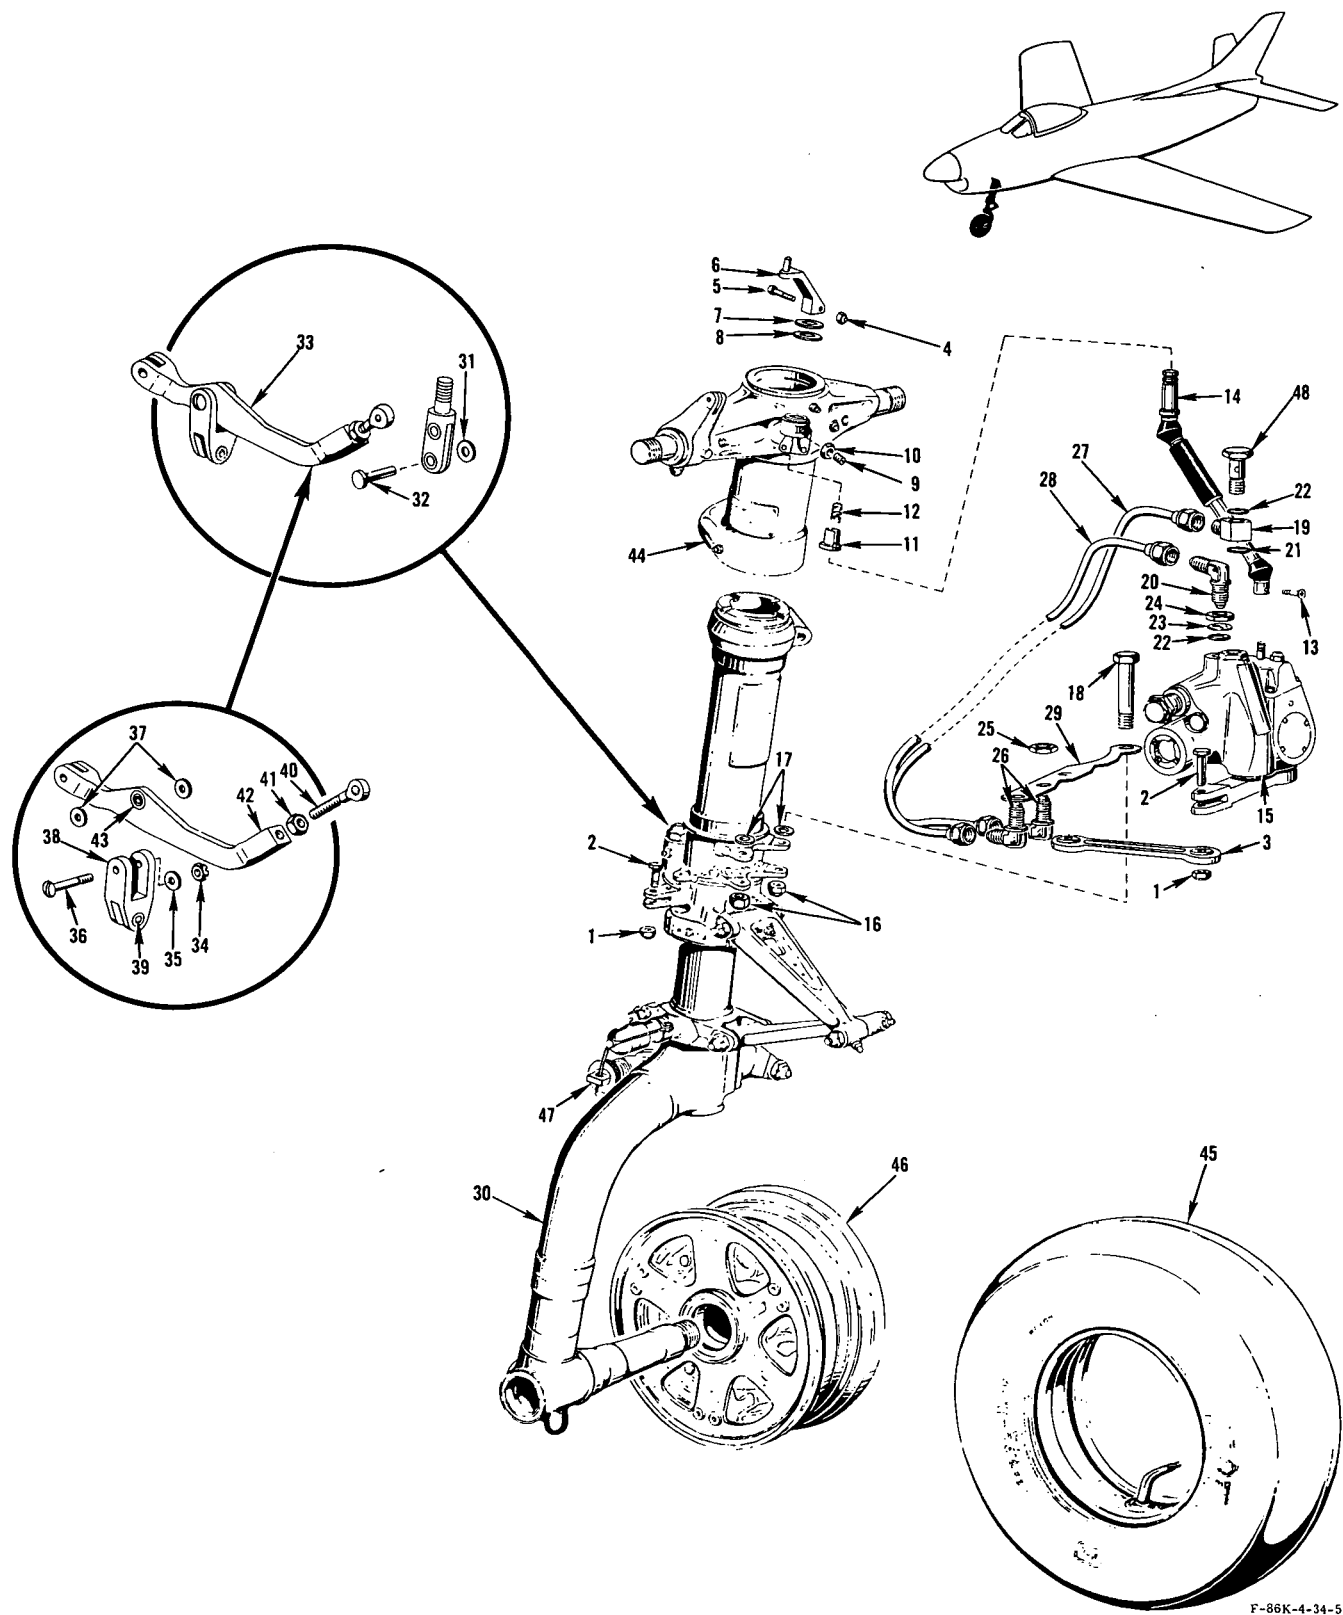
AUXILIARY ALIGHTING GEAR CHASSIS ASSEMBLY
